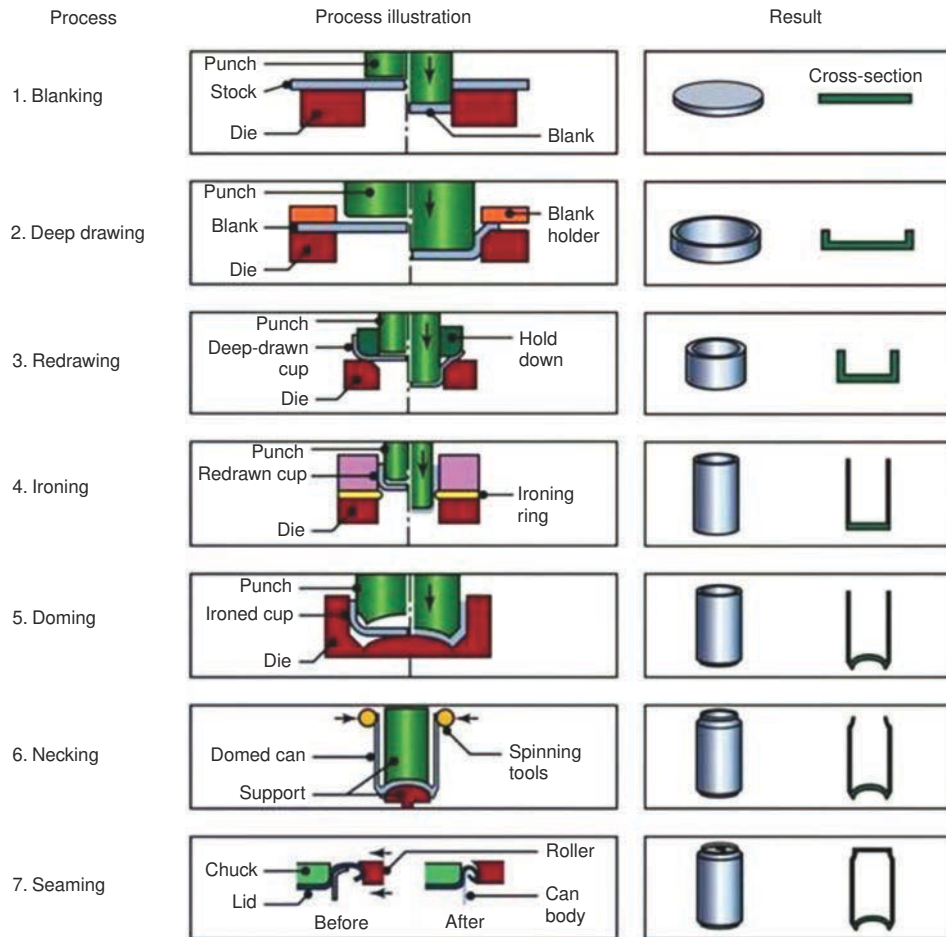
Forming processes used to manufacture a two-piece aluminum can
